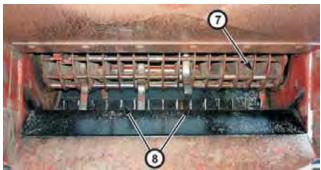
(7) Open caged rotor with fixed rotor blades, (8) Secondary knife cutting
